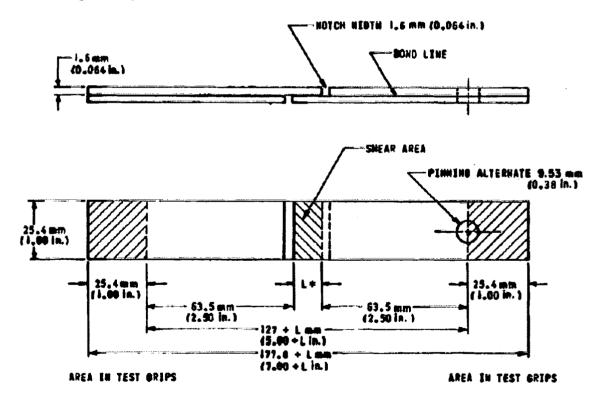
ASTM D 3165 Test Specimen Profile [ASTM 3165]
